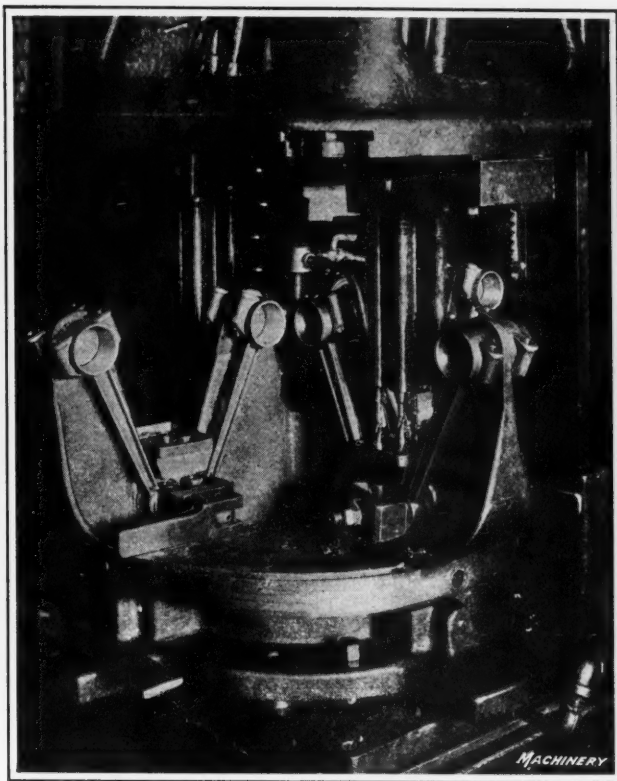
Drilling Bolt Holes in Small Ends of Connecting-rods
